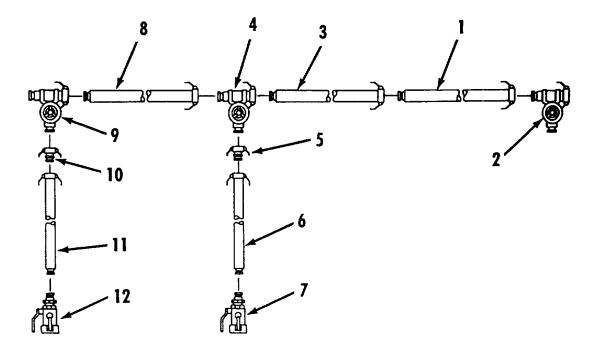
Fuel System - Bottom Loading Point to Drum Filling Points Removal.
